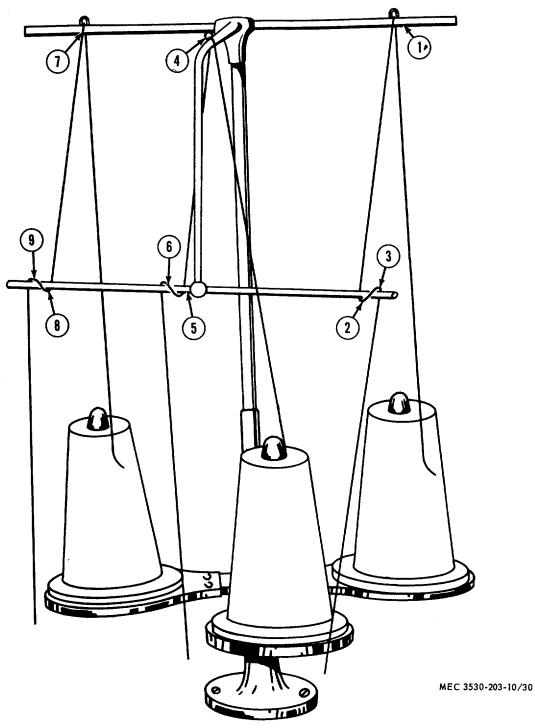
Threading sequence for unwinder (overedge sewing machine).
